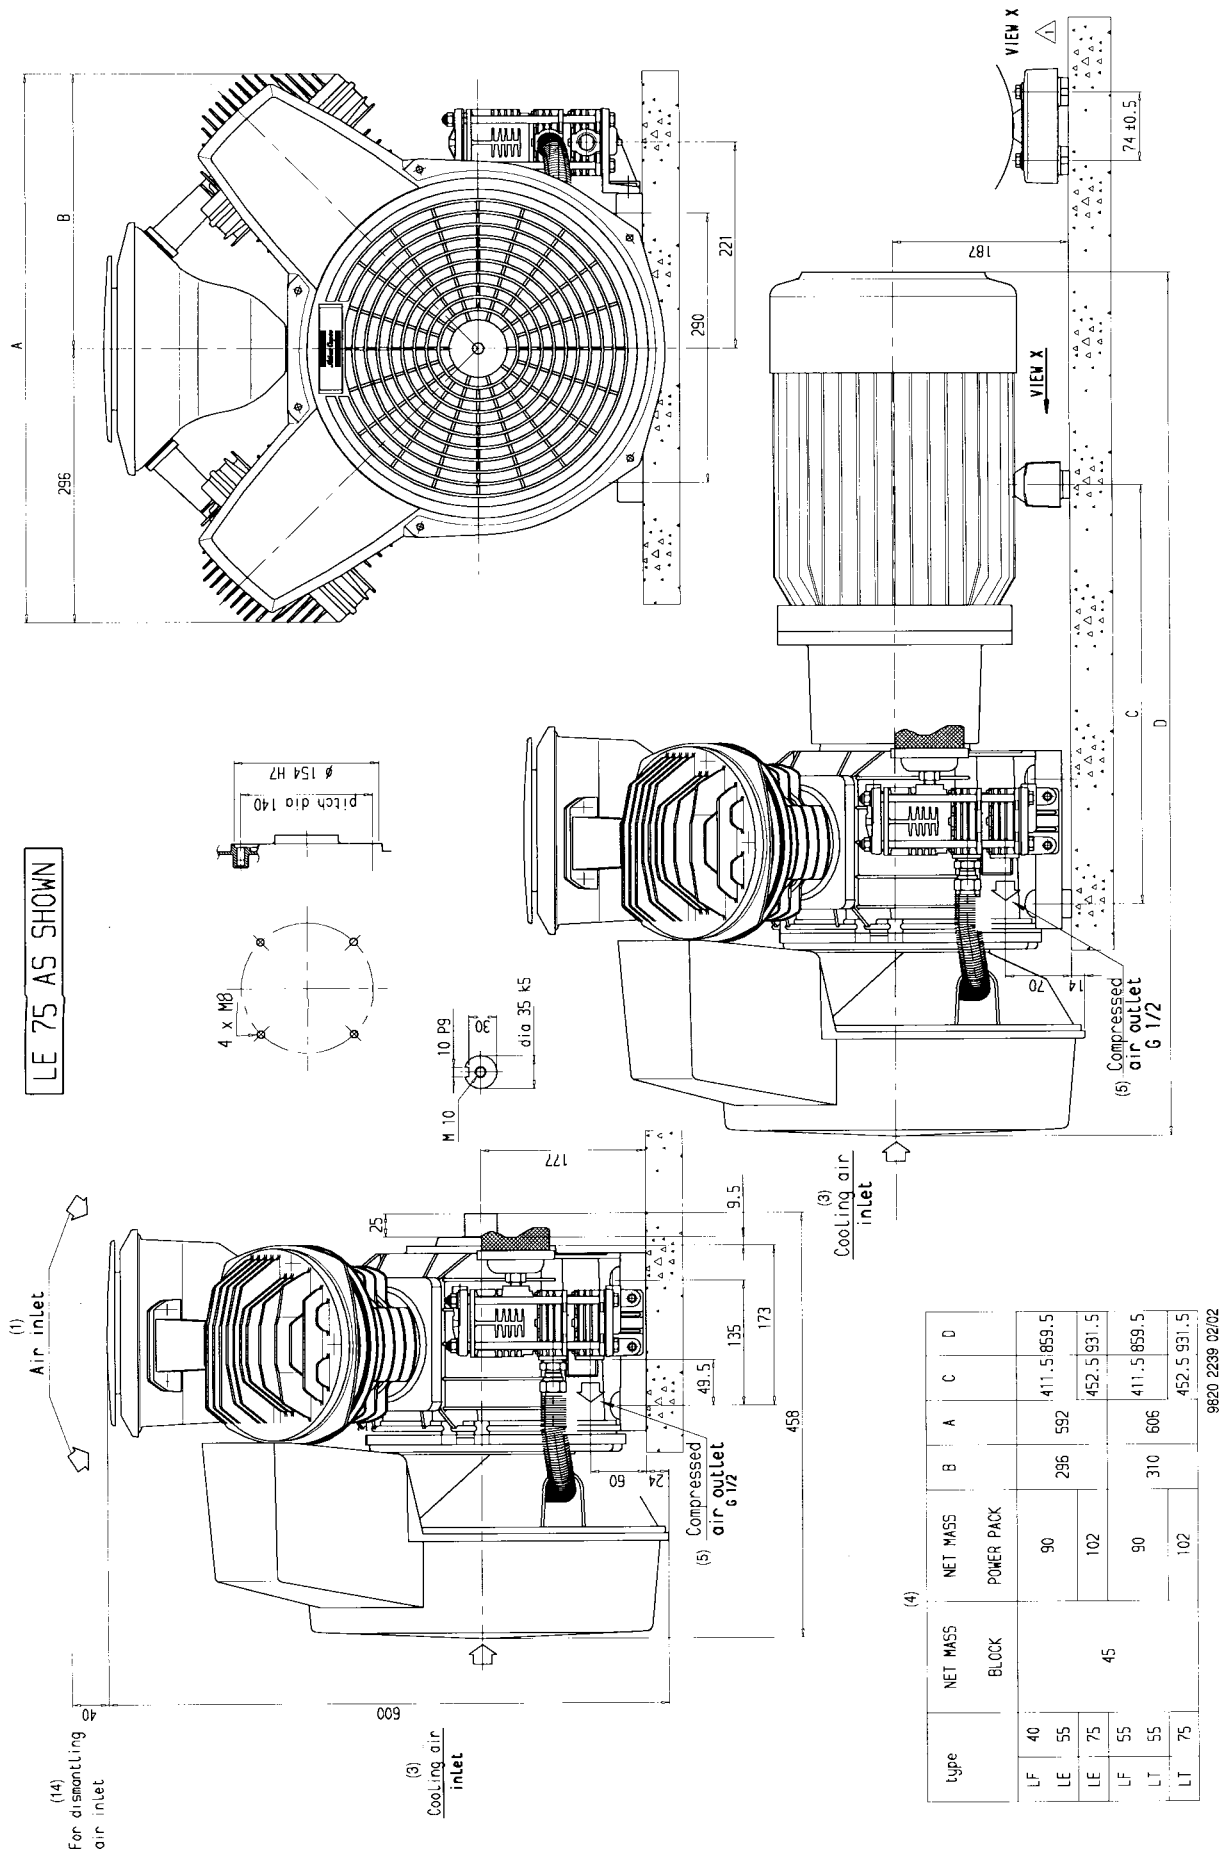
Dimension drawing, LE/LT55/75 and LF40/55 Power Pack
